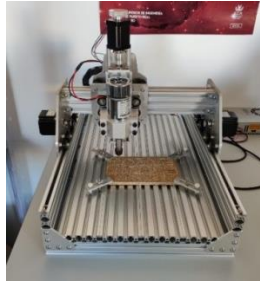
LEKN(C1) 3020 CNC Router Machine Kit cnc machine.
